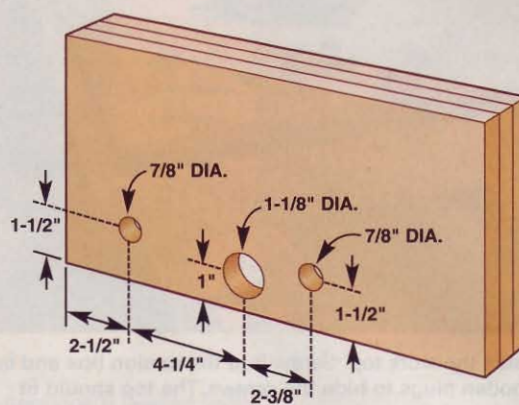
FIGURE C WORKBENCH VISE FILLER DRAWER FRONT DETAIL
